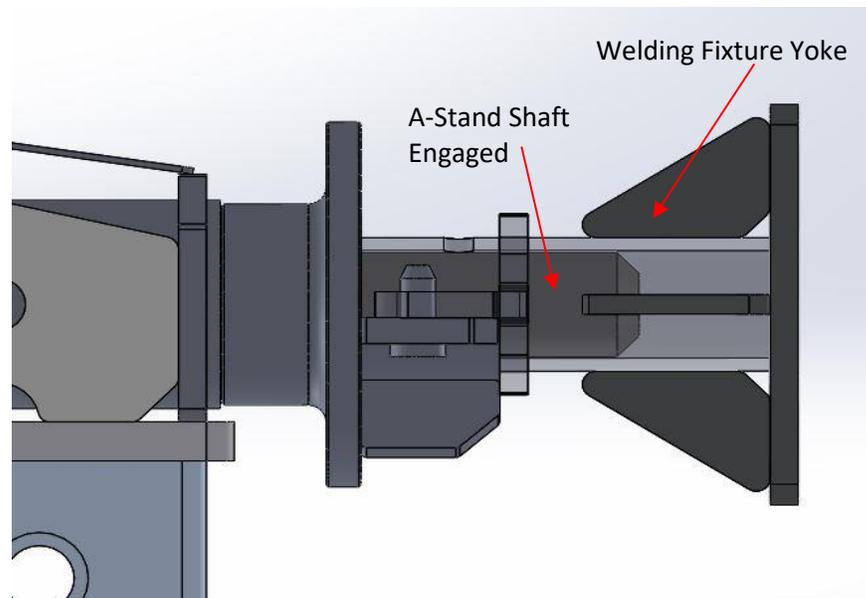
Final Drive End Design, Shaft Engaged with Welding Fixture Yoke
